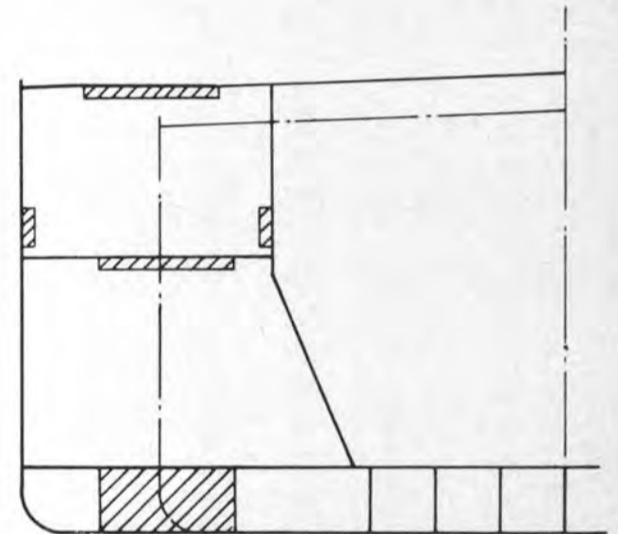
Install new spar deck section and lift removed side shell and spar deck sections into place.
